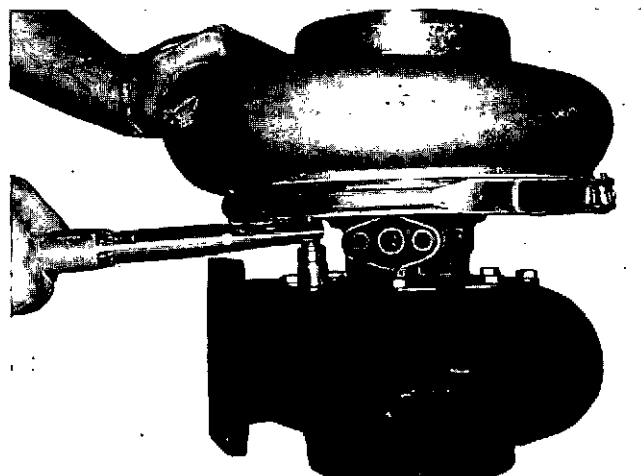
, (TA43). Torquing the turbine housing capscrews
